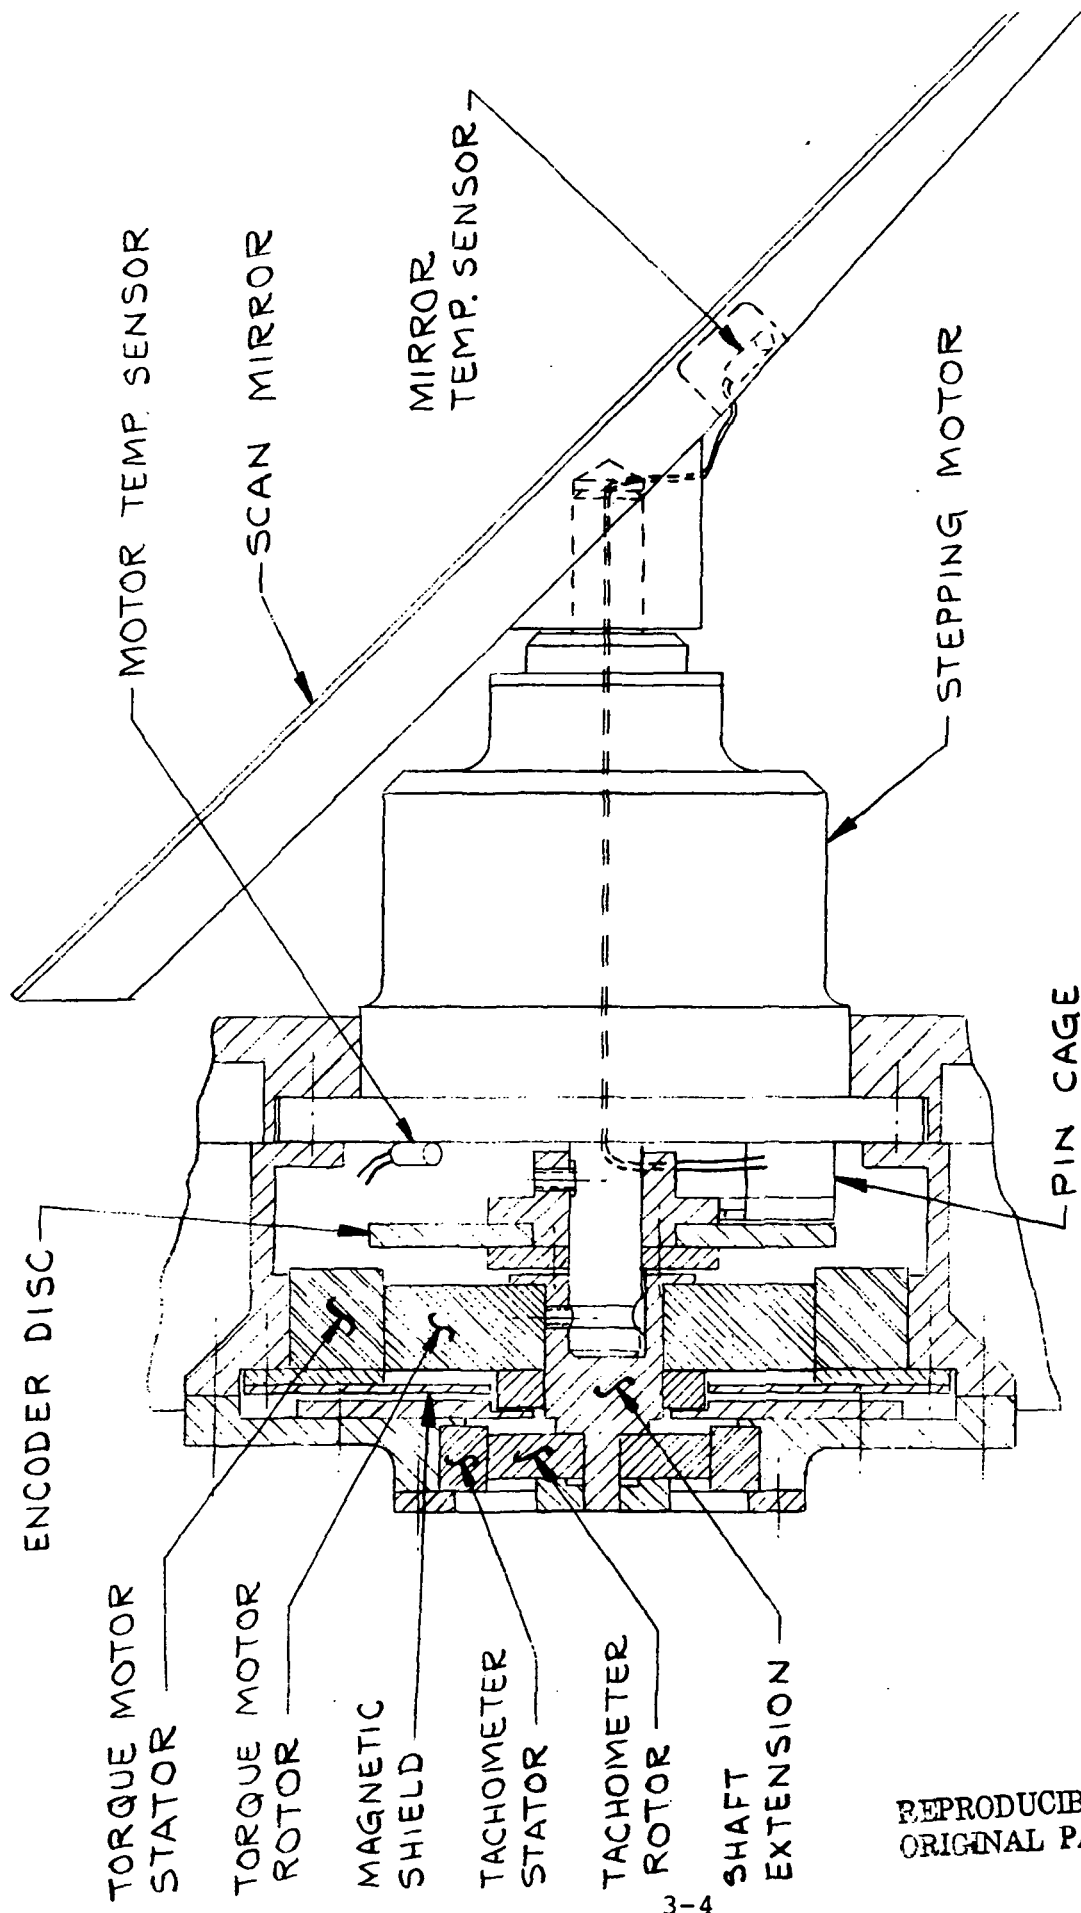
MIRROR SCAN DRIVE ASSEMBLY
